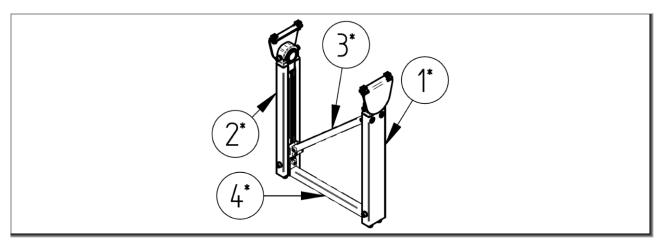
Parts list: Conveyor support AM 010 ZZ.982.0106.00
